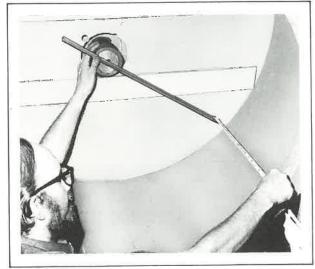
MAKING SWEEP TOOL MEASUREMENT.
